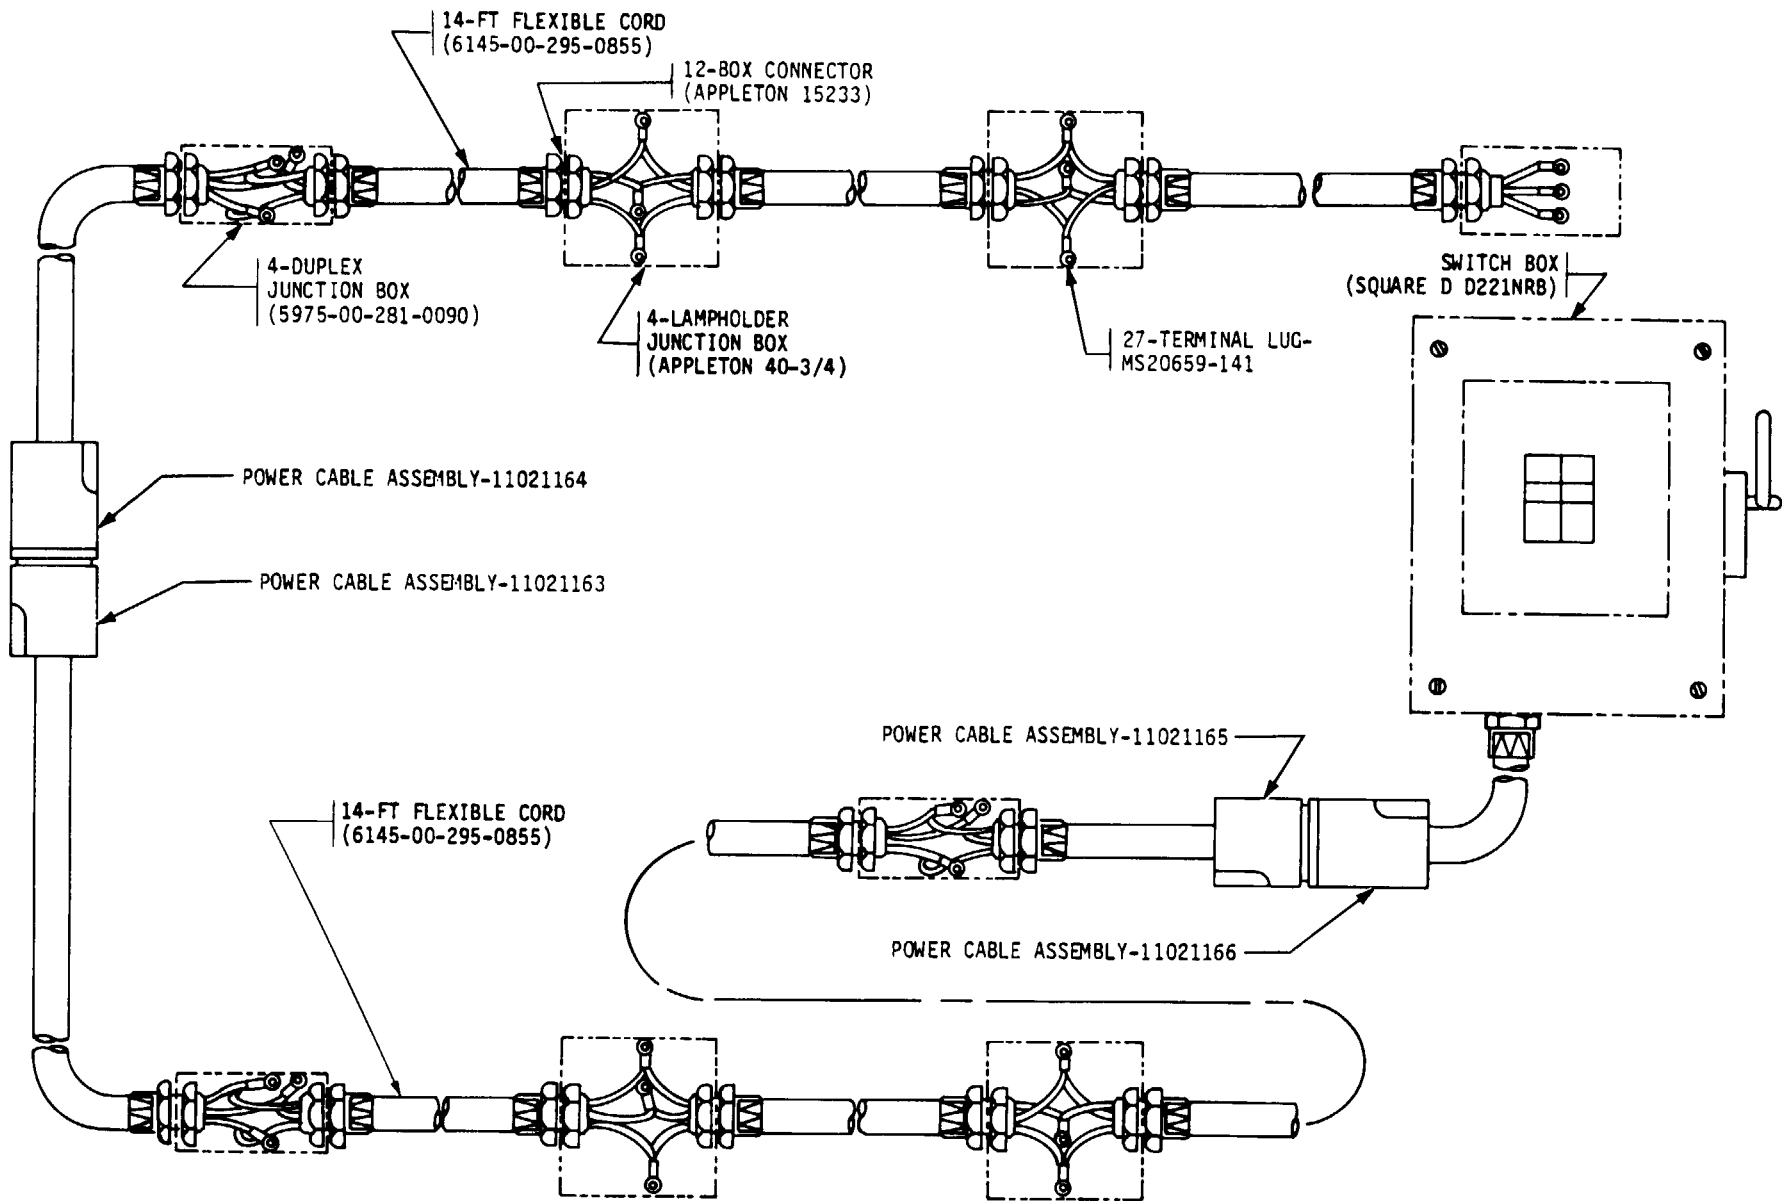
Electrical Schematic, Units 2 and 3, M35A2.
